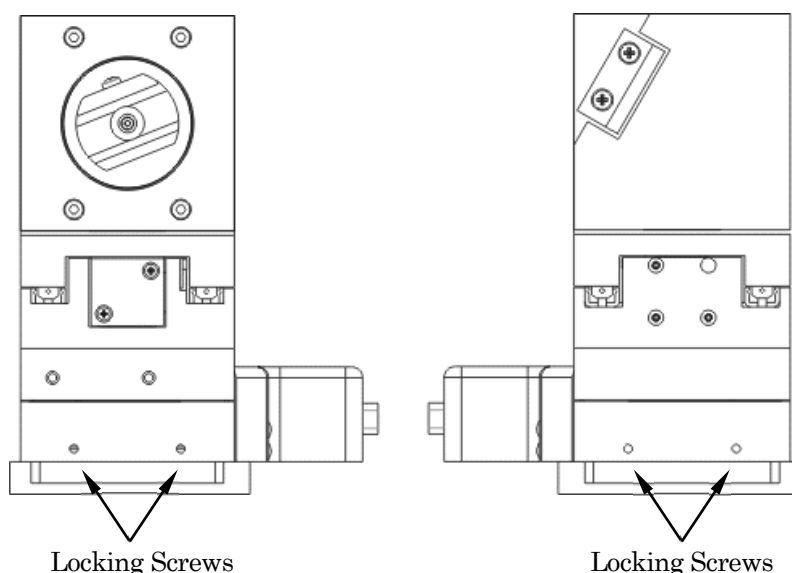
Side view of TRIO MP-245/M showing mounting adapter plate and lock screws.
